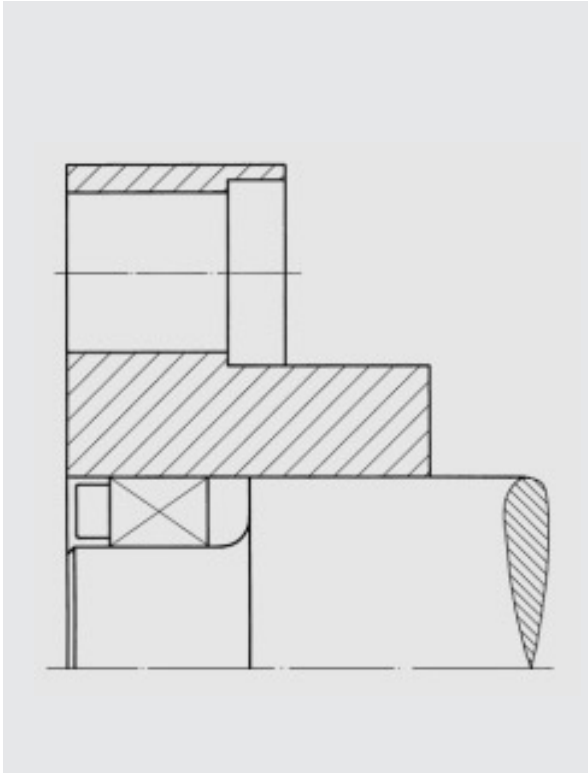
· Coupling half mounted with one Locking Assembly RfN 7012. In this arrangement, the shaft is stepped to permit the largest possible hub cross-section.
